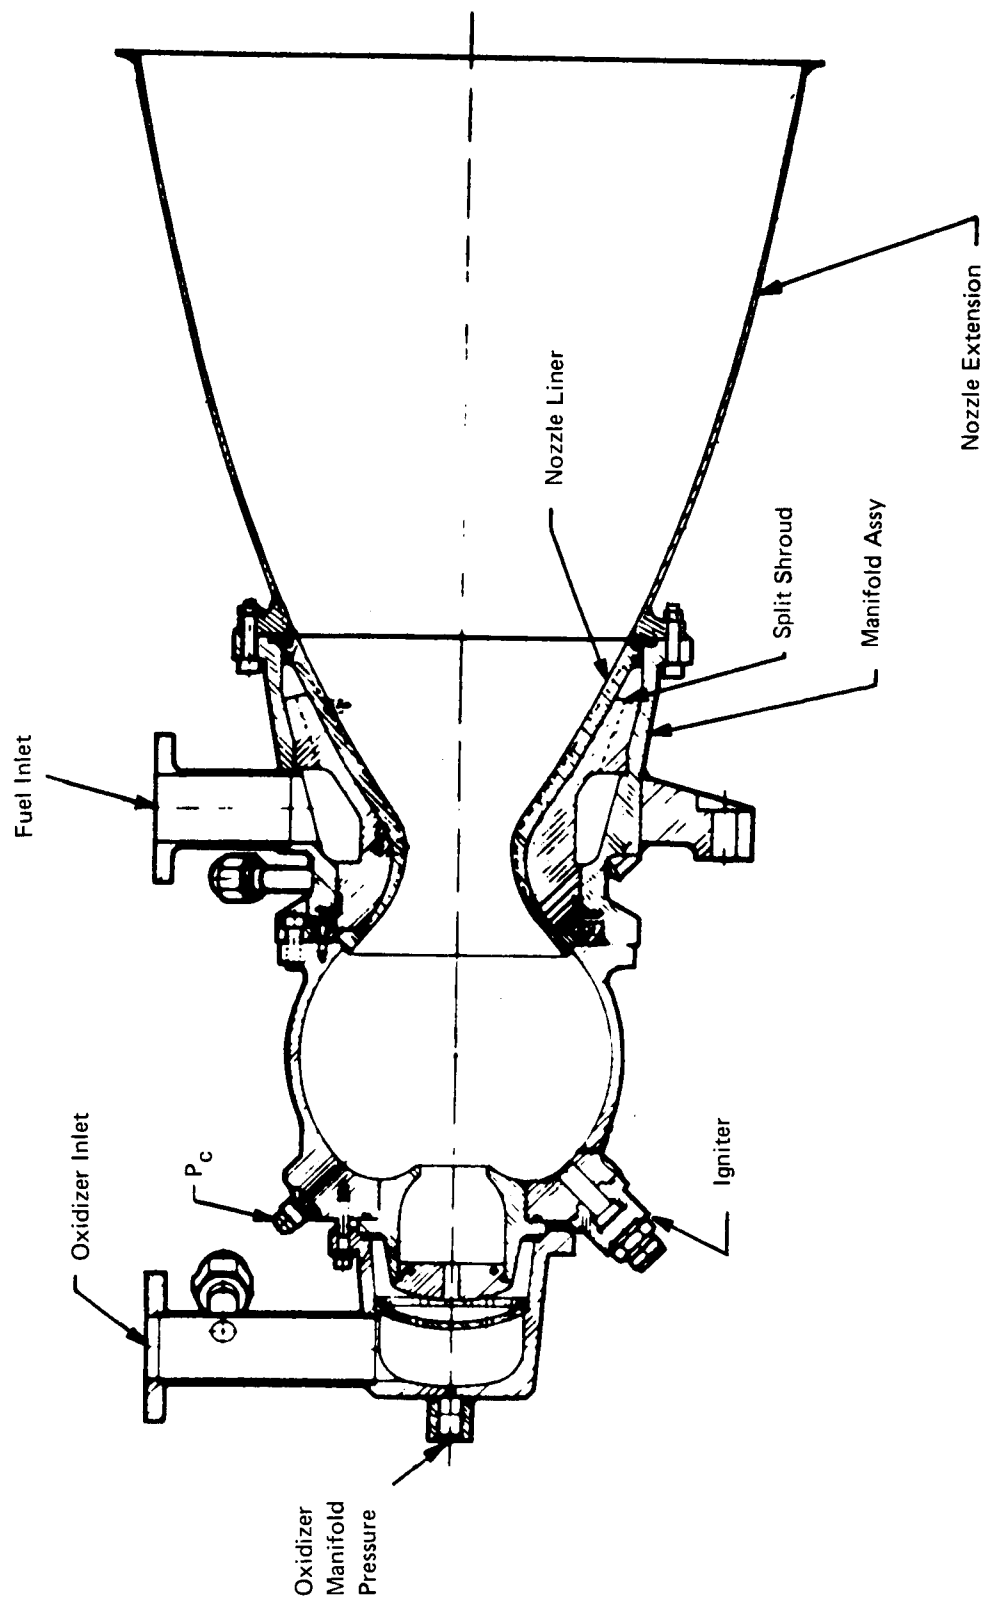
1500-lb 6672 N Thrust Altitude Test Assembly - Cb Extension
